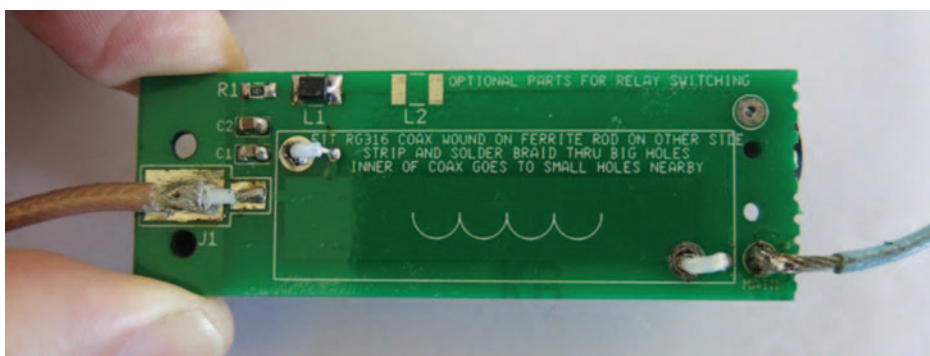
Rear view of the Ruthroff transformer PCB.
